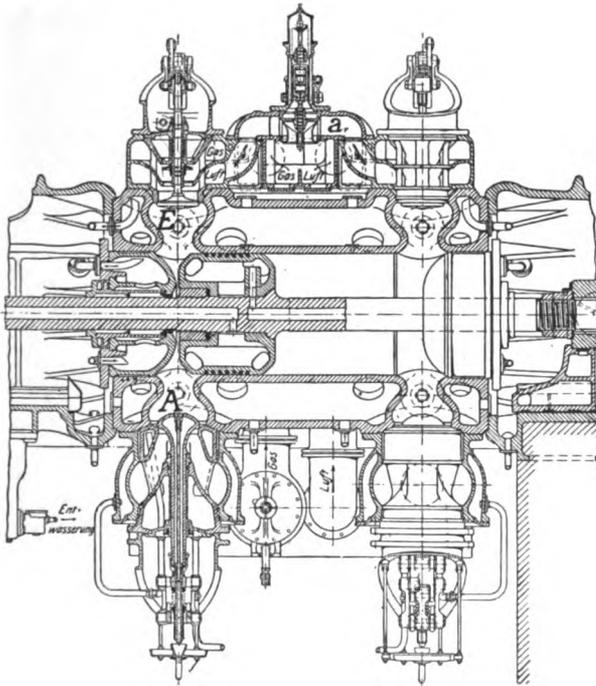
Governing Device, Otto-Deutz double-acting Engines.
